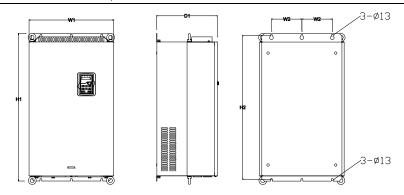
Wall installation of 380 V 132-200 kW VFDs
